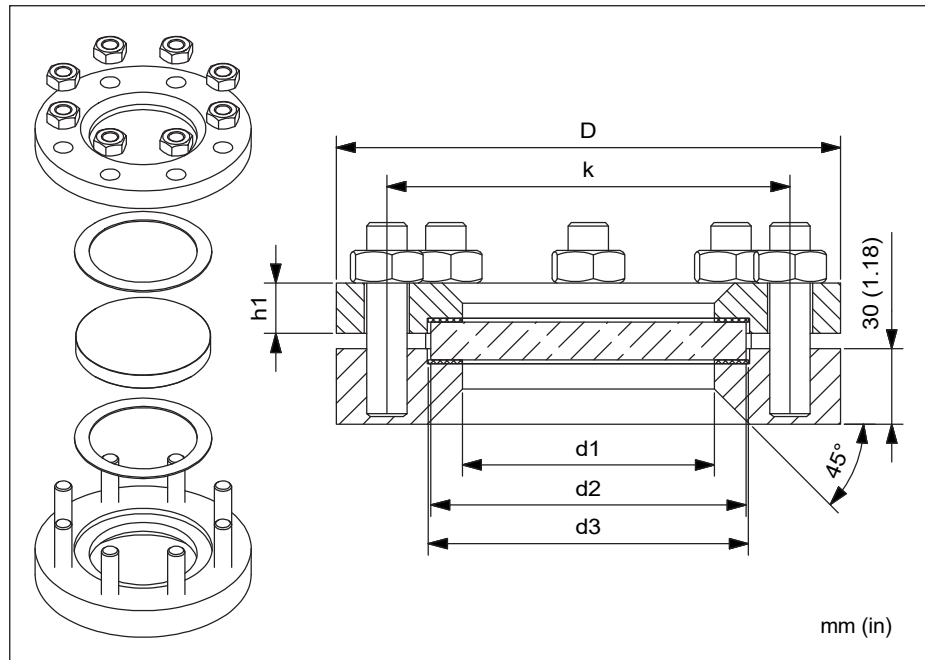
Dimensions of sight glass fitting for welding on/in for processes up to 1 MPa
